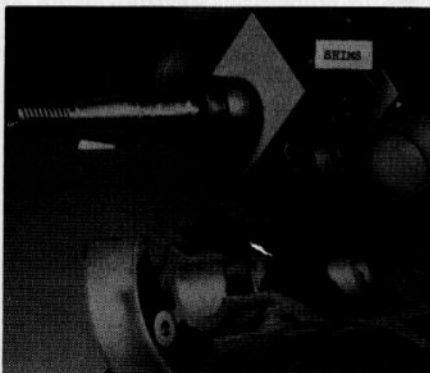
View showing placement of shims (Fig. HL243) between thrust washers (15—Fig. HL241) and bearings (14) for correct crankshaft assembly. Refer to text.
